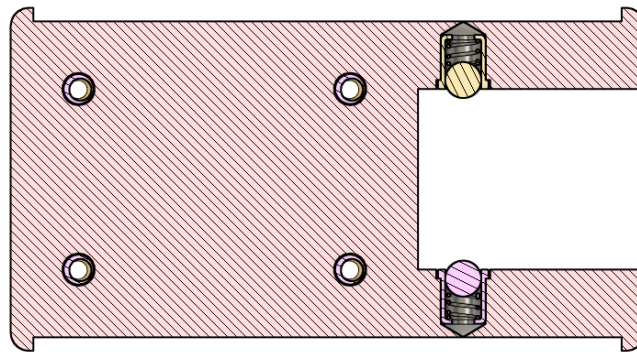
Ball detent mechanism on the mounting piece of the wedge alpha design.
